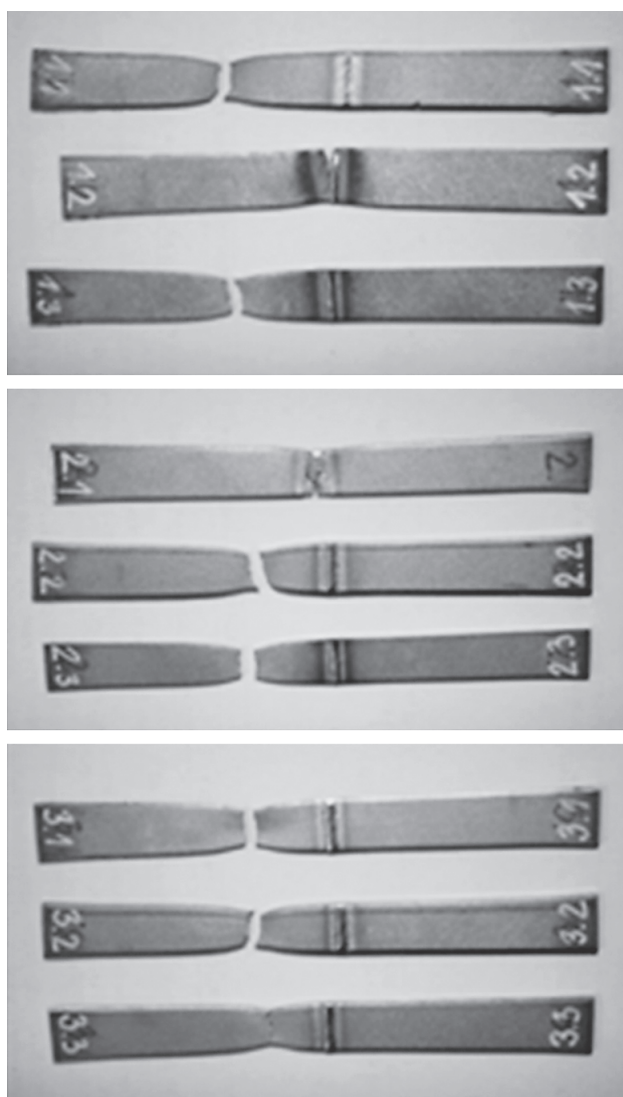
Test pieces made from samples 2.4, 3.4 and 3.2 after tensile test
